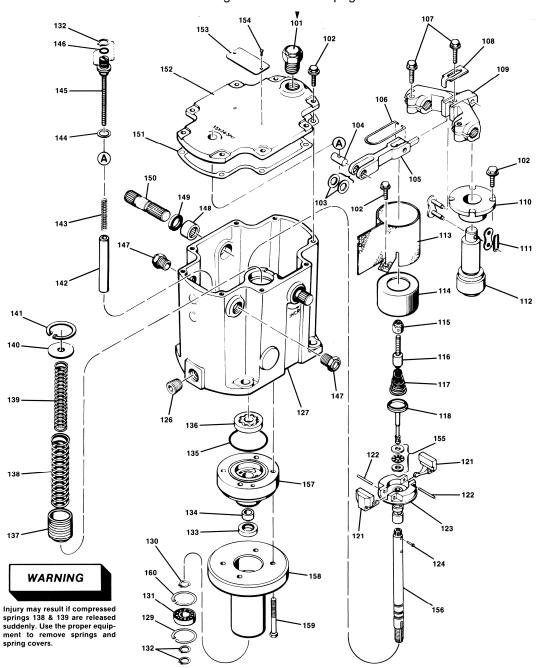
Parts for the TG-13 and -17 Governor with Extended Drive Shaft, Diecast Aluminum Case, Screw Speed Setting
